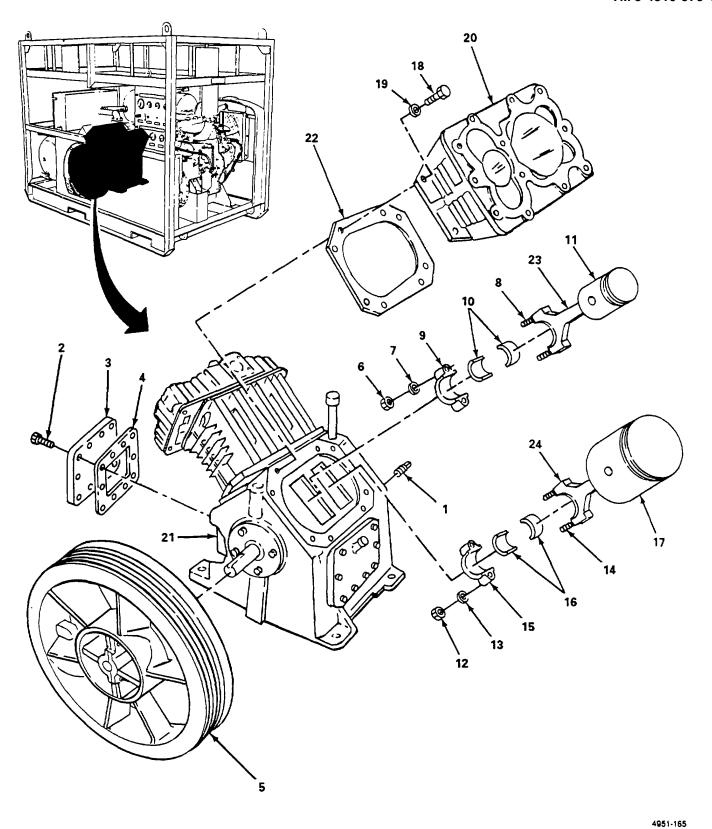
Compressor Pistons, Connecting Rods, and Bearings, Removal.
